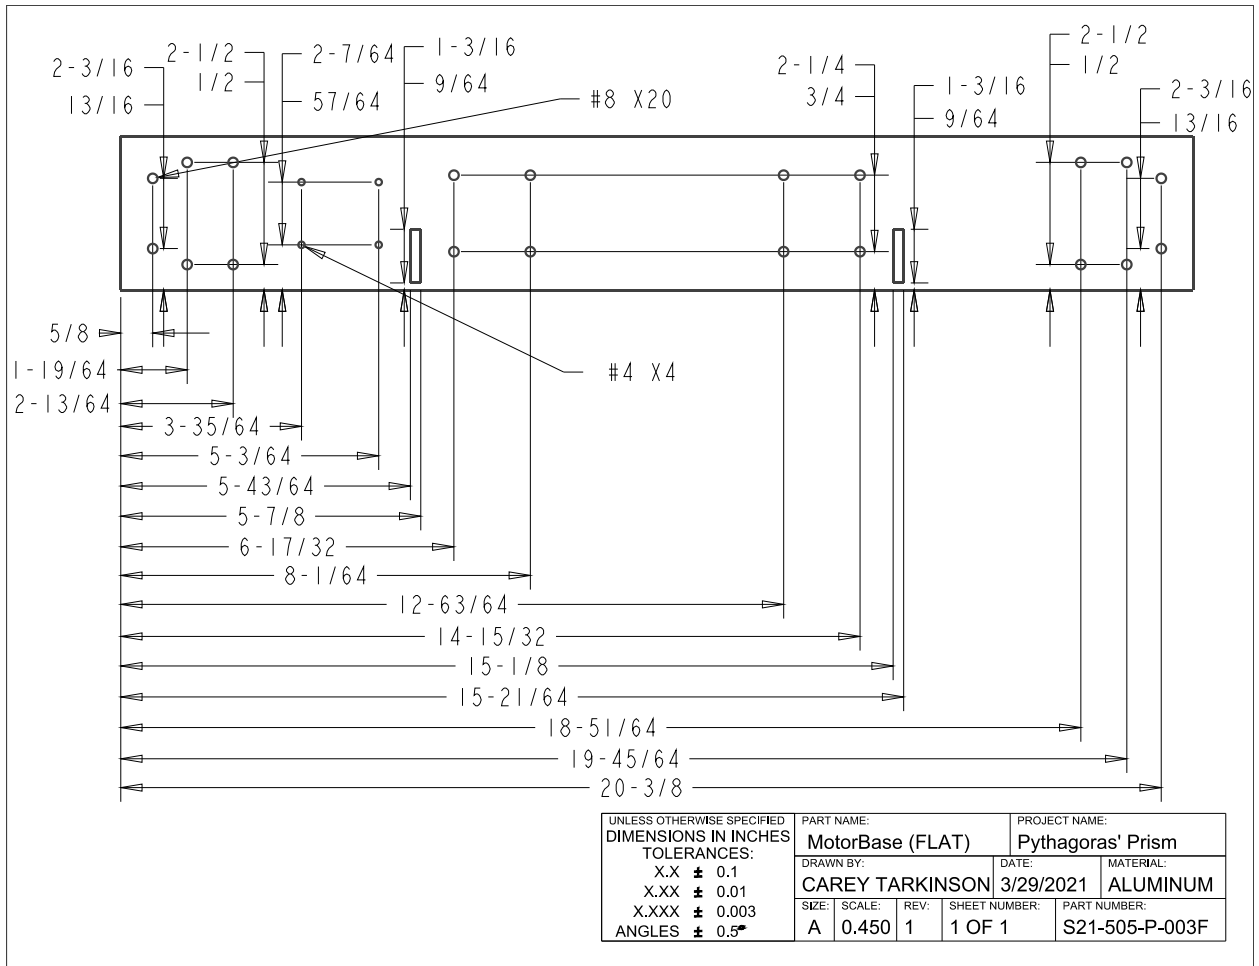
Engineering drawing of motorized base with dimensions for machining.
